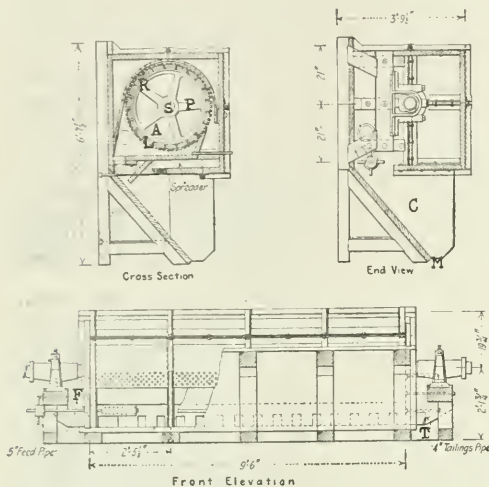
DETAILS OF THE FLOTATION MACHINE AT THE BURRO MOUNTAIN MILL.
